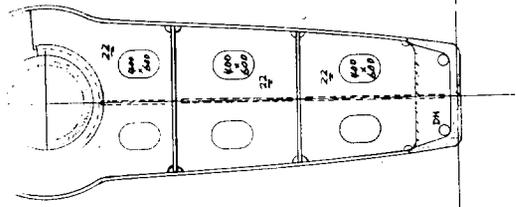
3(1) 標準 STERN FRAME. (4) LOWER PART (CAST-1)
